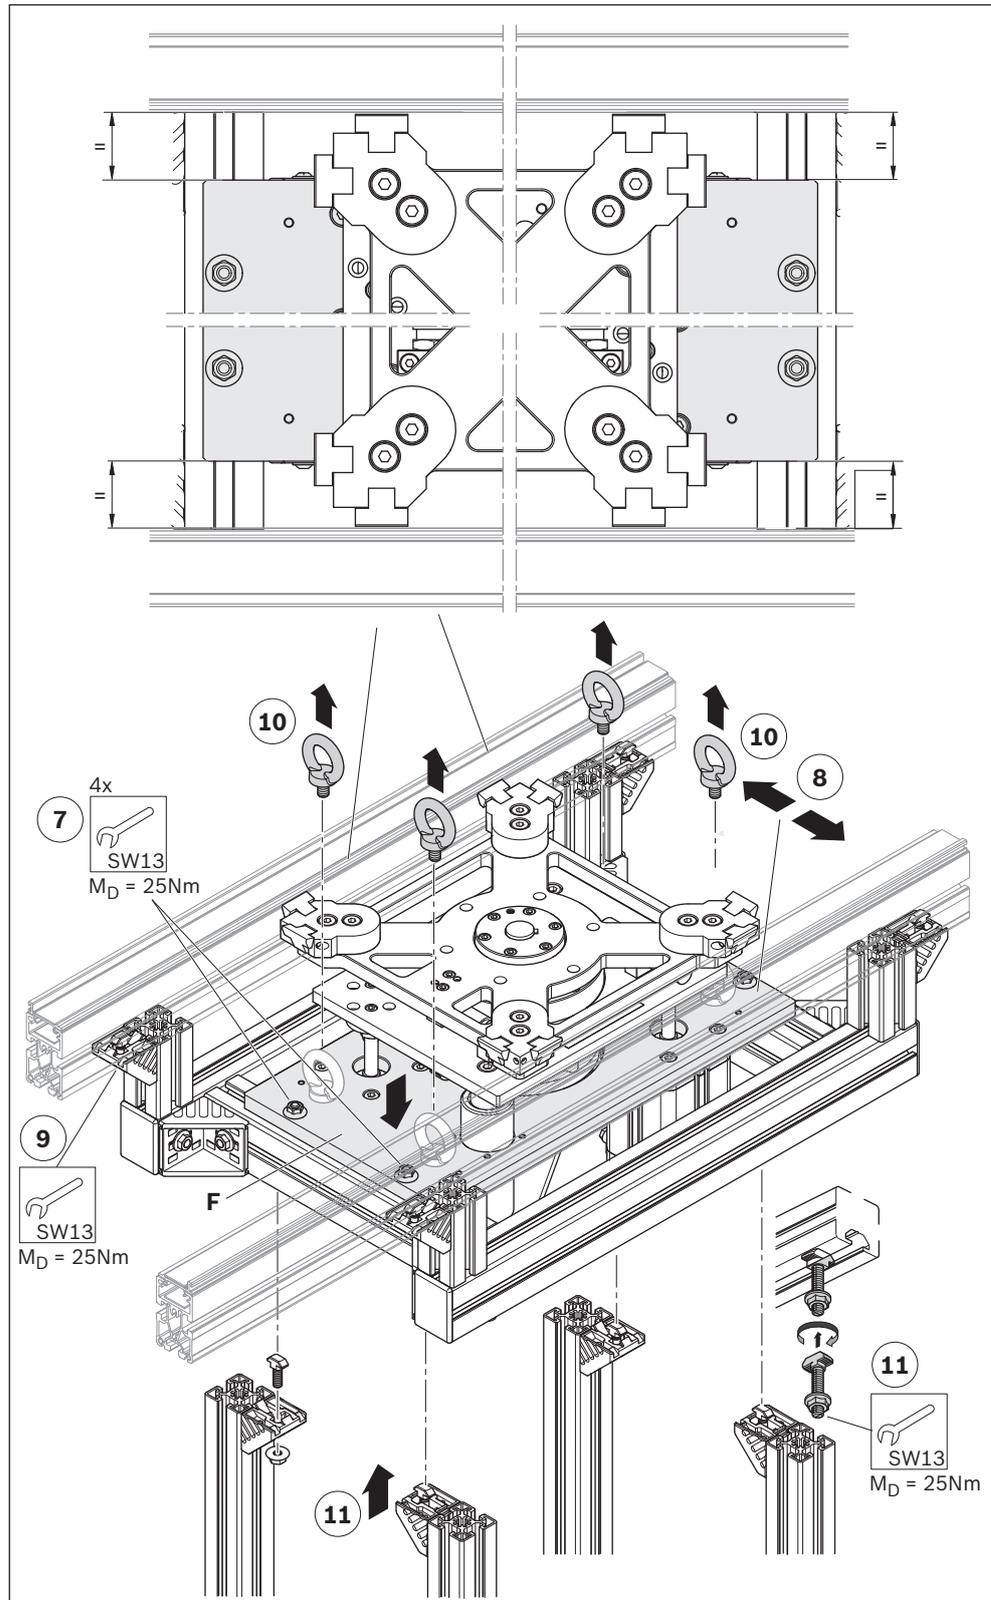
Adjust lift rotate unit HD 2/H size 2 and 3 in section ST 2 (example shown here size 2 180°)
